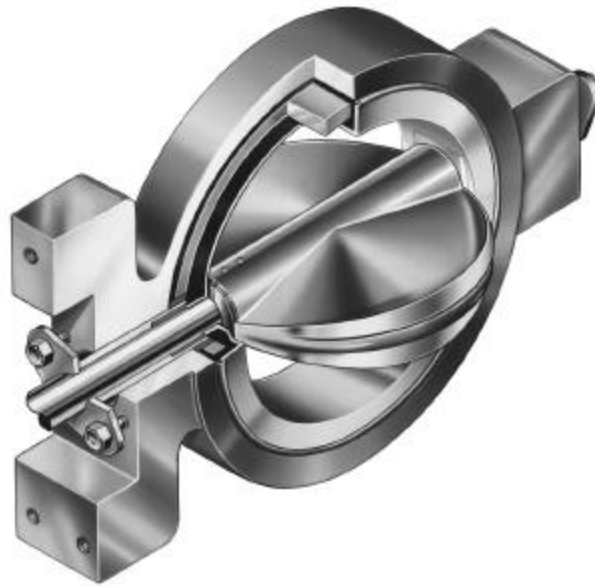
Partial cutaway view of a butterfly valve. Courtesy of Fisher-Rosemont.
